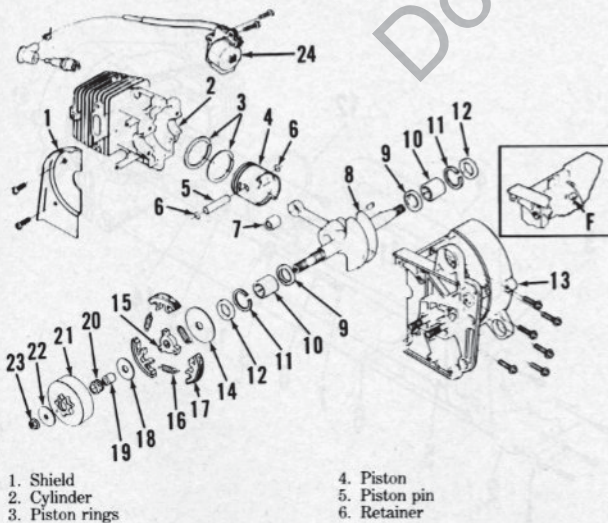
Exploded view of engine and clutch assemblies. Pulse fitting (F) is connected to oil pump pulse hose.
